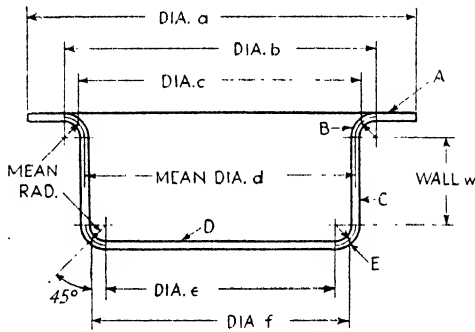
Sketch and formula for calculating blank size for a drawn part.
